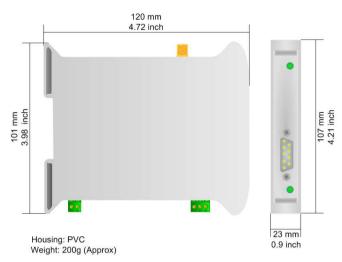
Mechanical dimensions scheme for HD67300-101-A5
